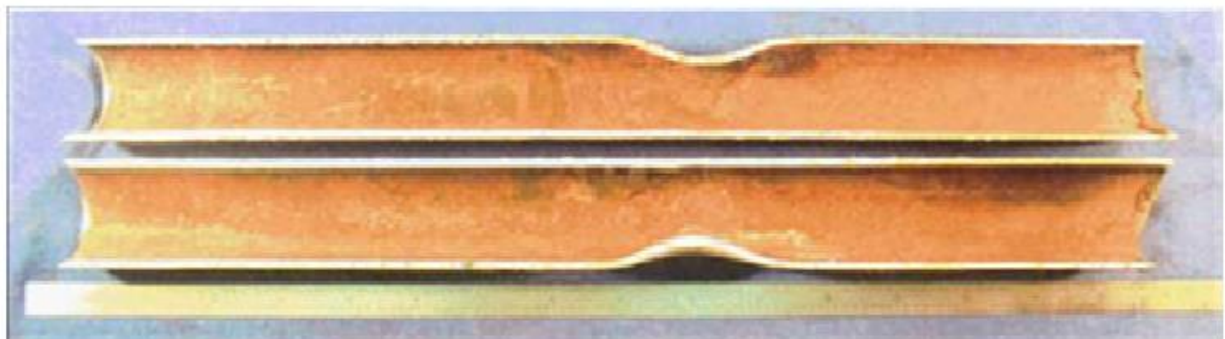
Figure F - Tube Partial Collapse at End of Ferrule Due to Steam Blanketing Conditions
